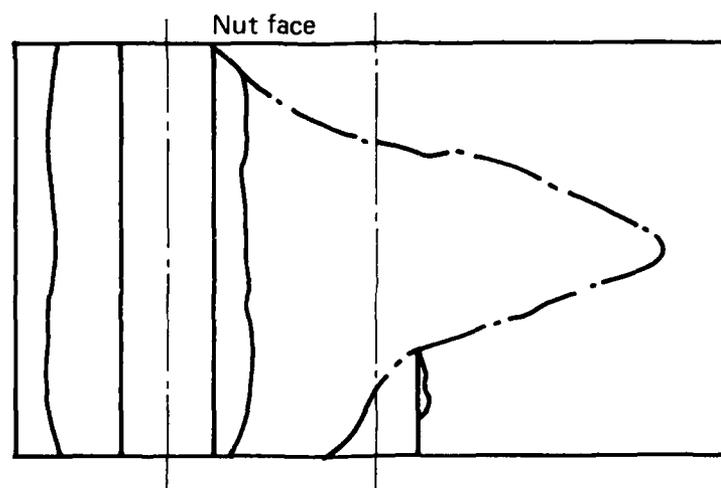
(b) FRACTURE SURFACES: SPECIMENS TYPE (C)
